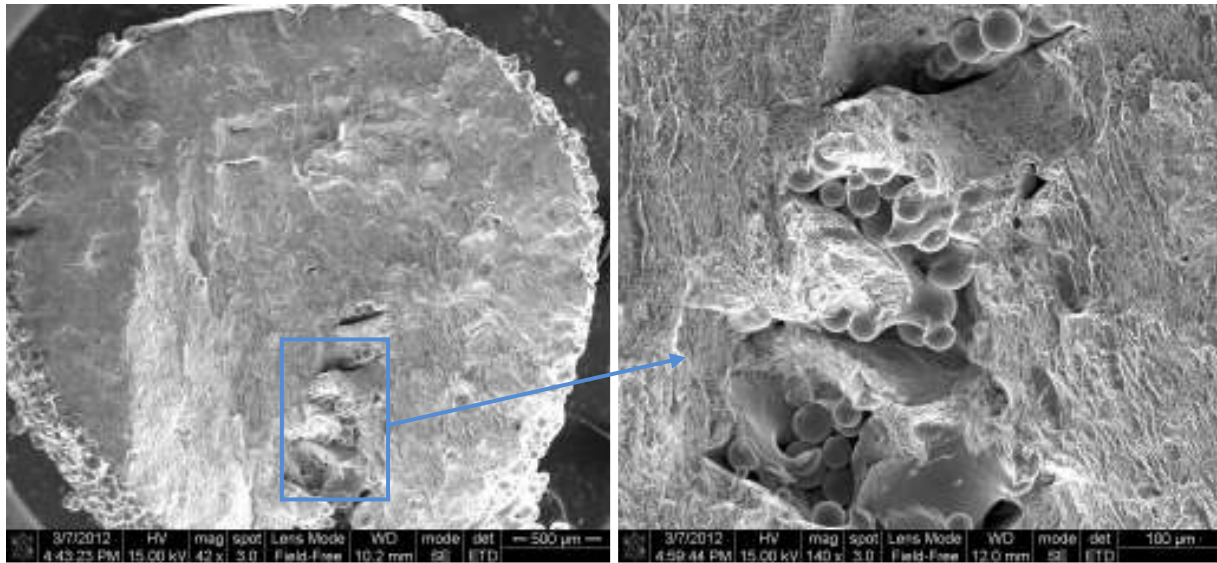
SEM image showing defects closer to the lower curvature at the reduced section in a fractured tensile sample
